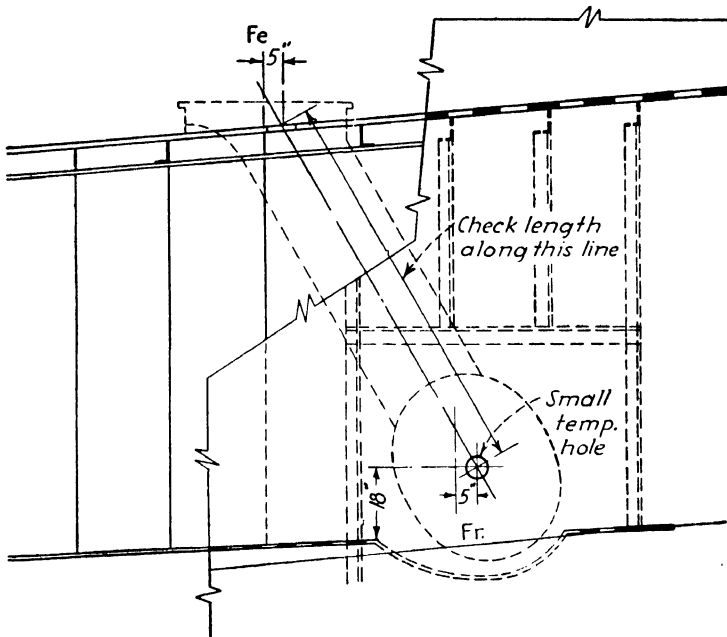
Method of checking length of hawsepipe to the center of openings in the deck and shell before cutting.
